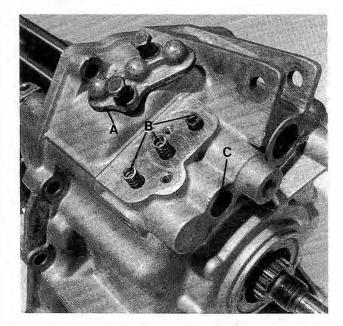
Shiftrod detent ballend plate (A), springs (B), and end plug (C). Detent balls are under springs.
